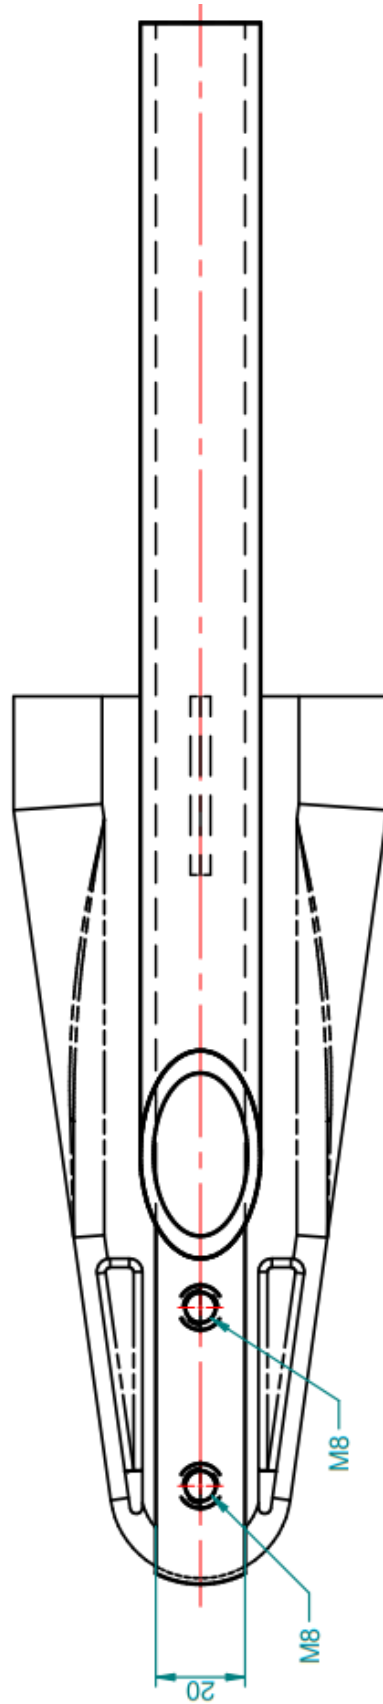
Installation of the pass-through pusher set to the FUTURA SLIM LAMELA 2 x 32 mm head
